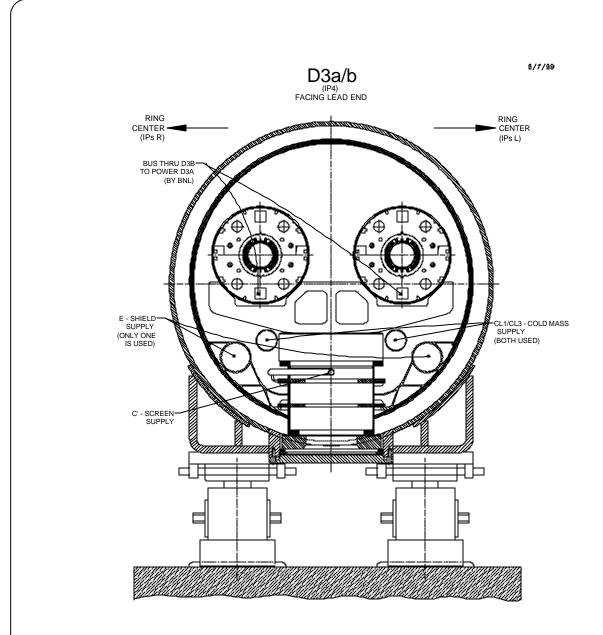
Sectional view of the LBRS (D3a/D3b) cryo-assembly
